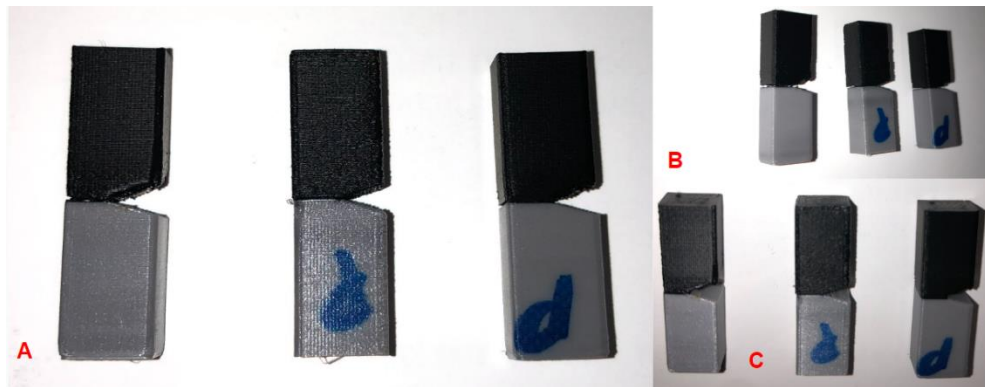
P_bp samples: A - front view; B – front and top view; C – Front and side view.
